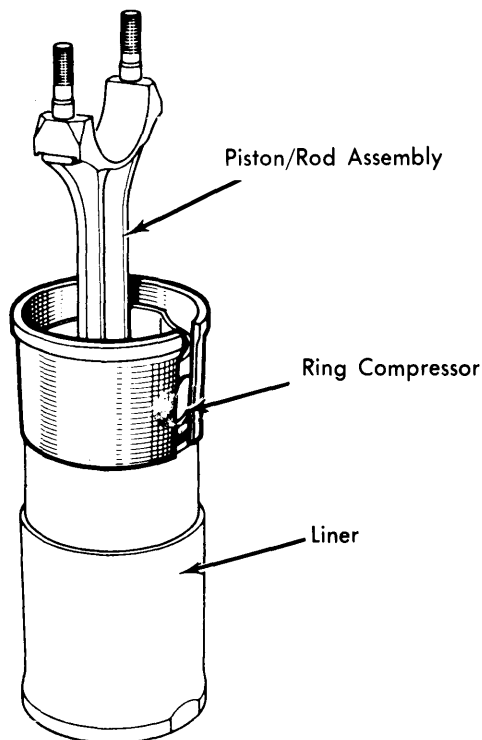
Inserting Piston into Liner Using Ring Compressor
